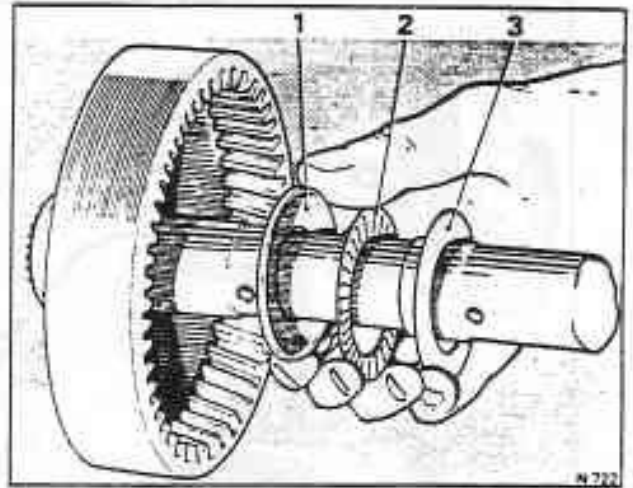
Fitting the races and thrust bearing to the inner face of the rear internal gear
